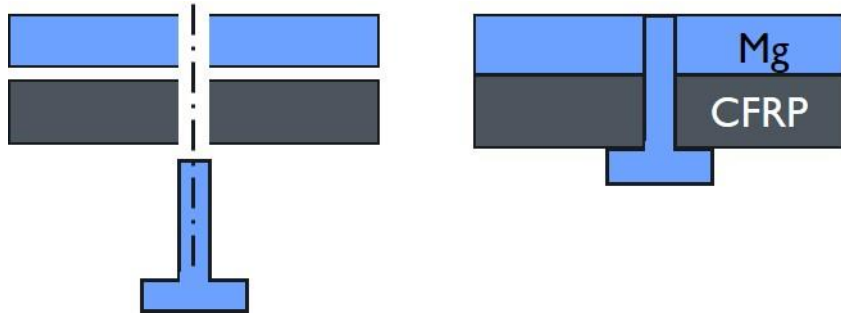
Configuration A: Machined Mg interlocks inserted through holes drilled in Mg and CFRP plates.
